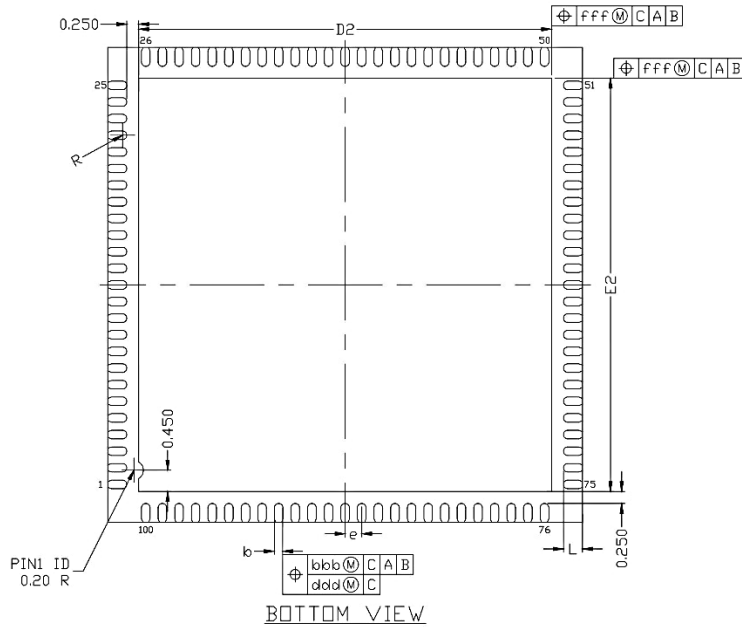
Package Outline Drawing of QFN100 10x10mm<sup>2</sup>
